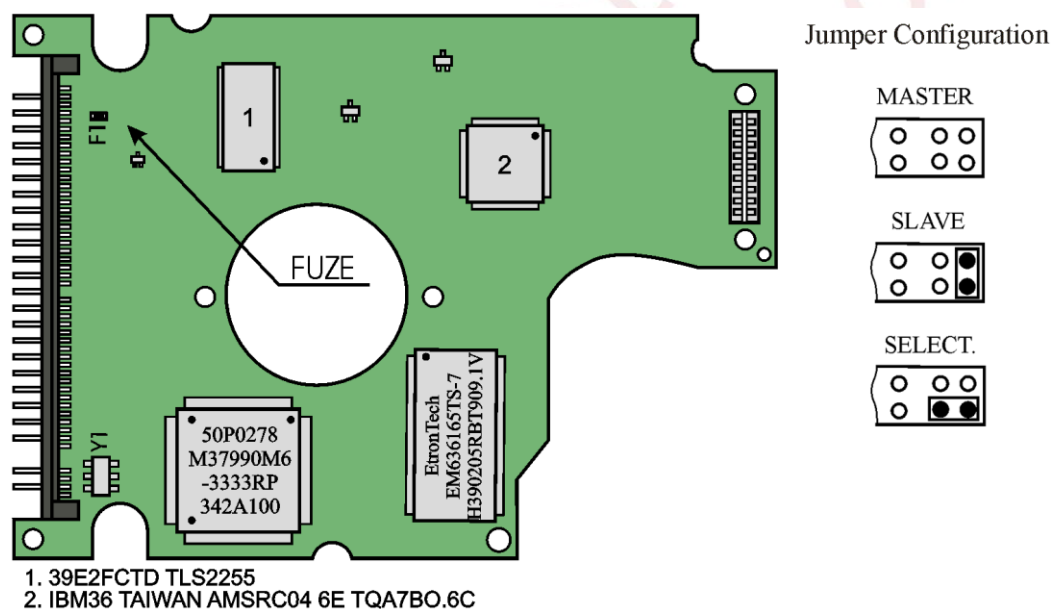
External view of the controller board in 40GN, ATCS drive family.
